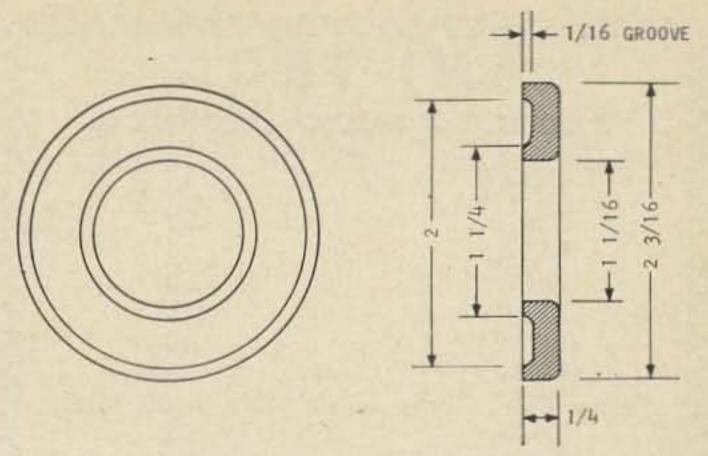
Drawing showing dimensions of end-spacers used on both the medium and high power toroidal tank coils. Polystyrene, 1/4 inch thick is used to make the end-spacers by means of a chassis fly-cutter mounted in a drill press. Wire tension and friction hold the end-spacers in place.
